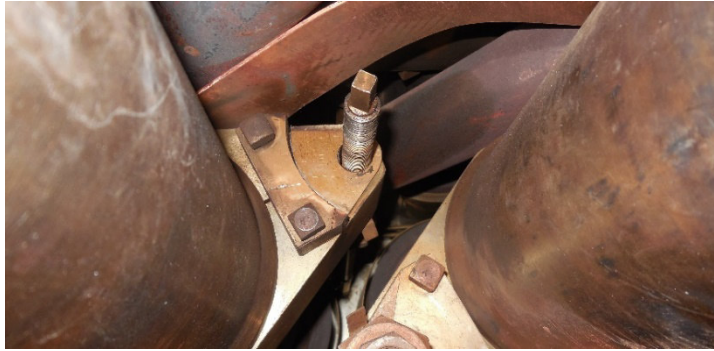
Laser cut section of triangular blocks of coolant channels.
